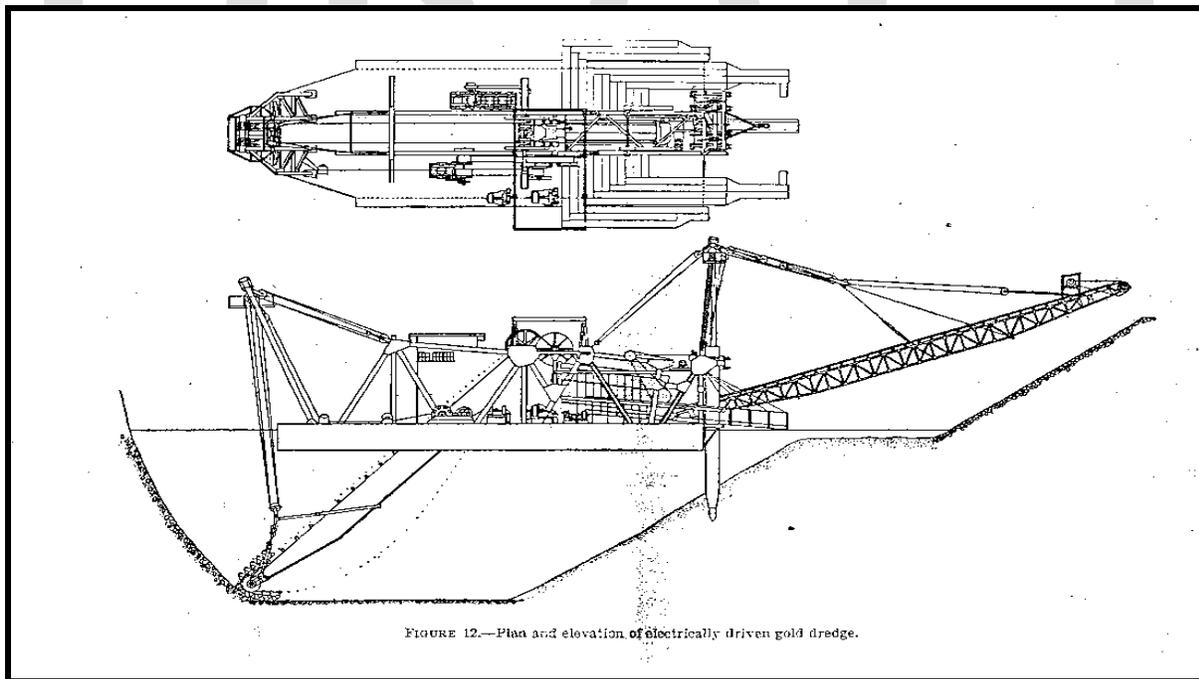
Plan and elevation of electrically driven gold dredge.
